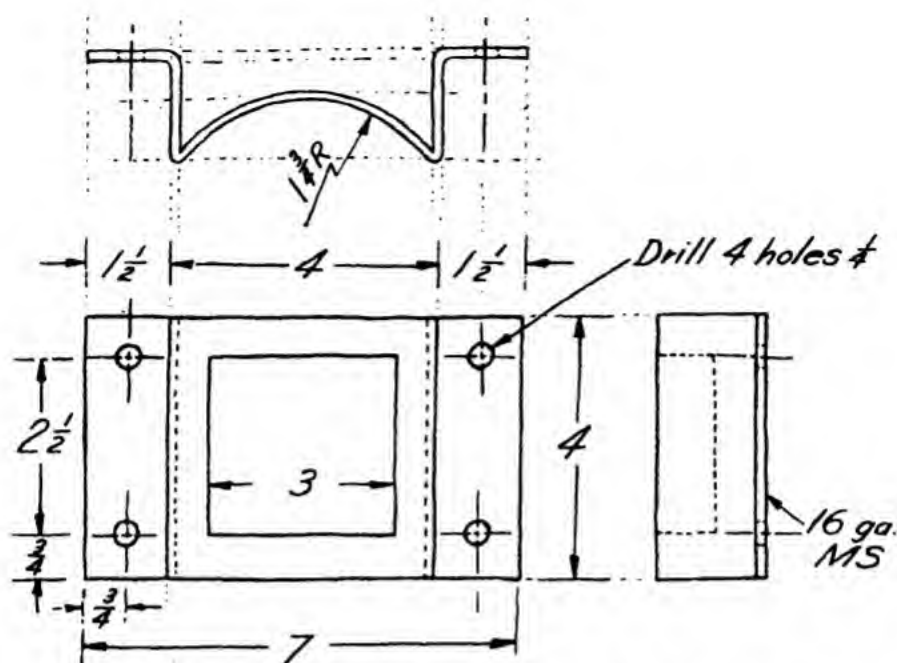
Orthographic detail sketch of oil filter bracket.
